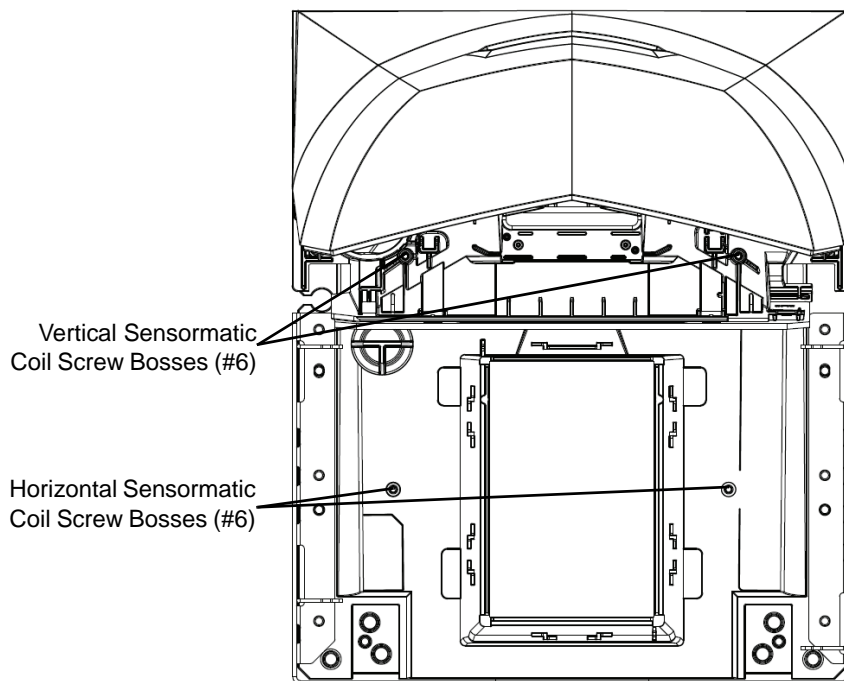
Sensormatic Coil Screw Holes (Platter and Tower Bezel Removed)
